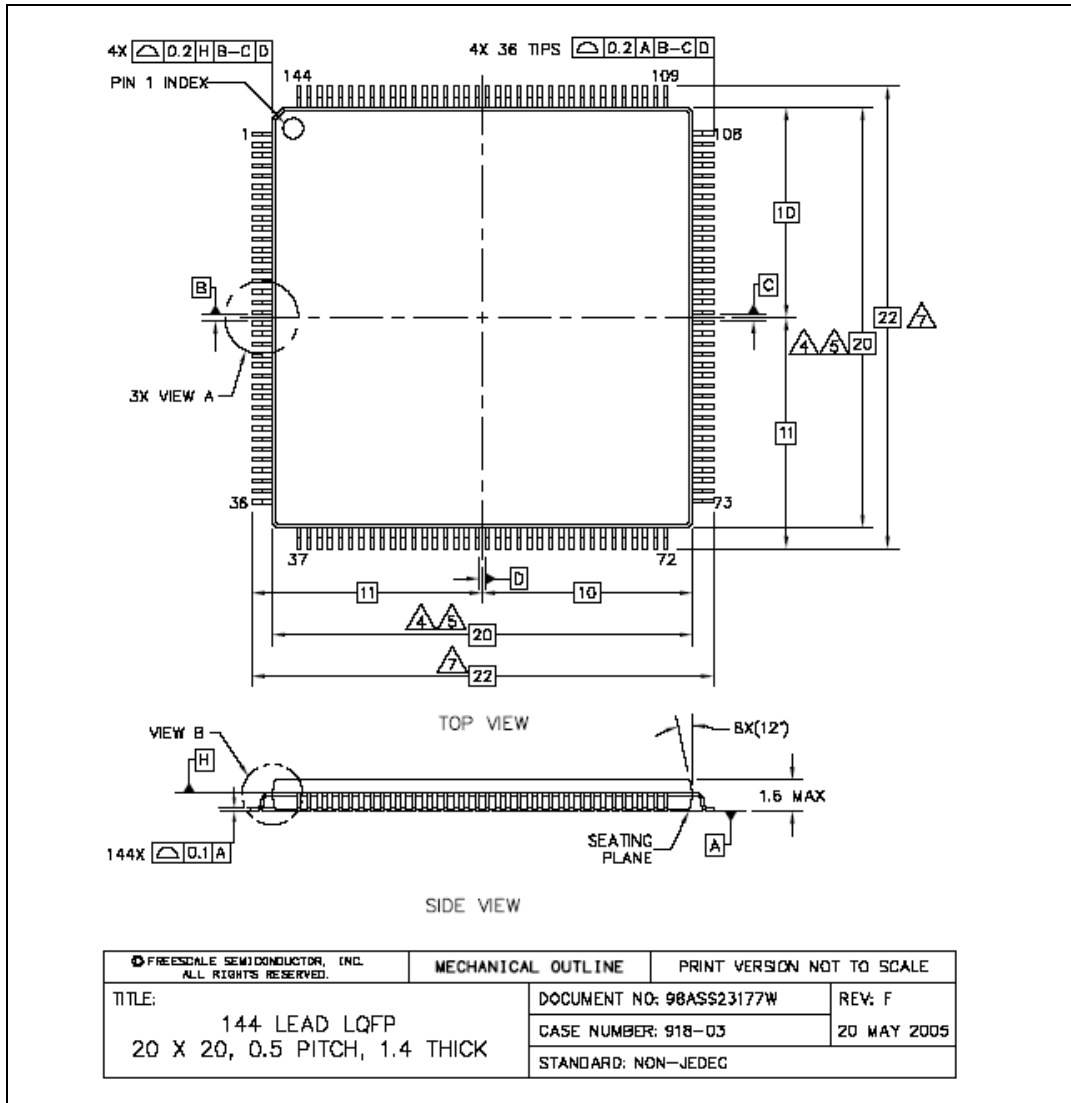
144 LQFP Package Mechanical Drawing (part 1)
